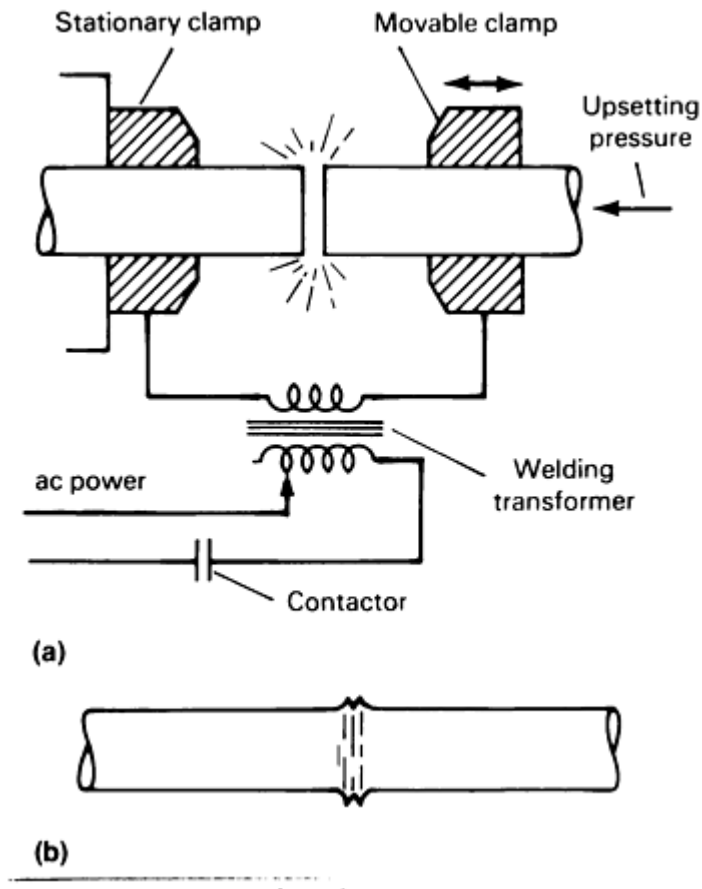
WELD PRODUCED WHEN USING THE FLASH WELDING PROCESS. (A) WORKPIECES SECURELY CLAMPED IN CURRENT-CARRYING DIES BEFORE UPSETTING OPERATION IS INITIATED. (B) FINISHED WELD PRODUCED AFTER UPSETTING OPERATION
